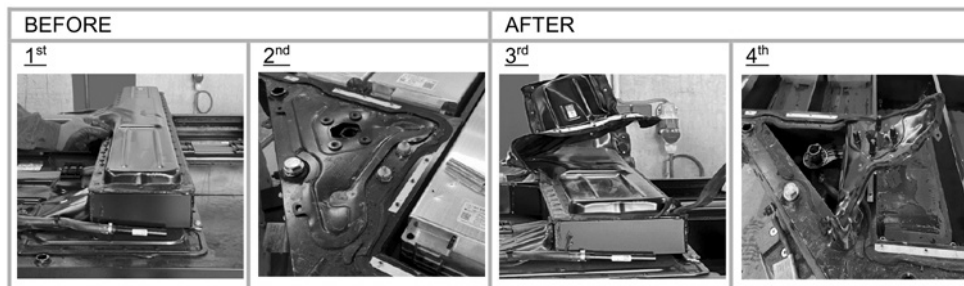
Challenging joining technology: 1st & 2nd: housing cover; 3rd & 4th: cover could only be removed with non-destructive efforts; 3rd: modules in silver visible; 4th: bonding of modules by adhesives visible
